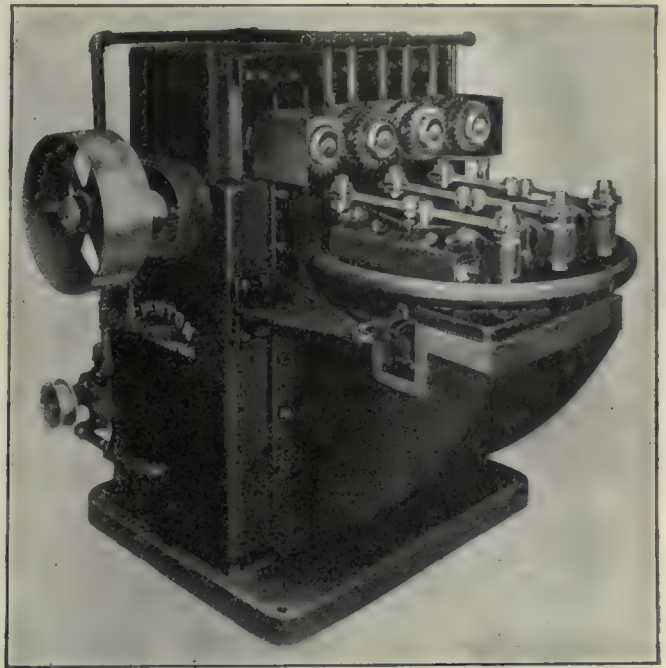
NEWTON C-76 FOUR-SPINDLE KNEE-TYPE MILLING MACHINE
